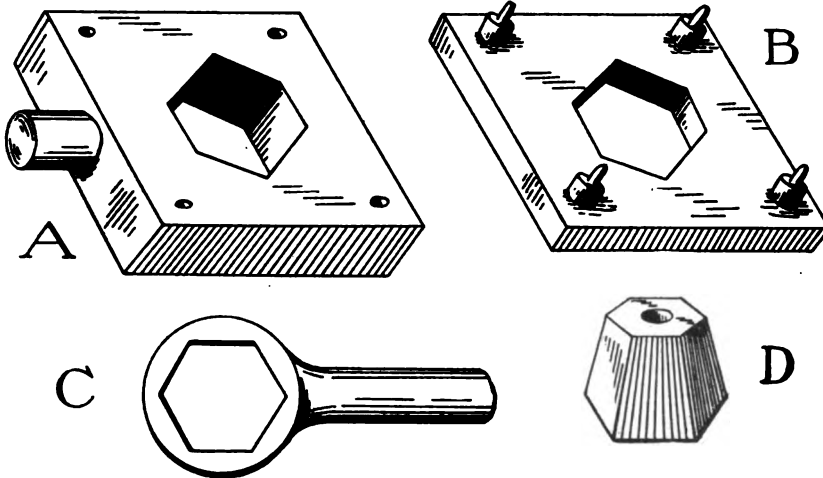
PARTS OF TOOL USED IN CUTTING OUT CROSSHEAD PIN NUTS AND CRANK PIN NUTS. C.—PUNCHING A HOLE IN A CLOSED HEXAGONAL WRENCH.
